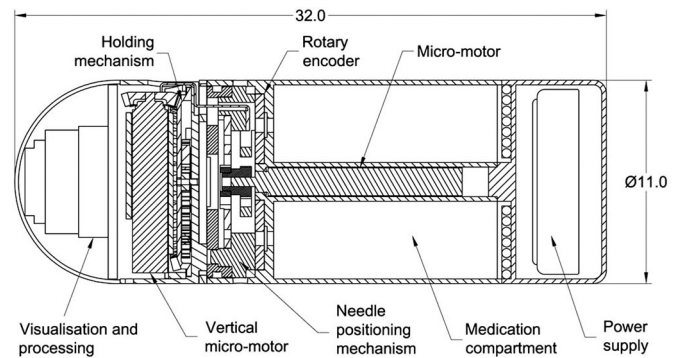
Cut-through view of the microrobot with the four main sections labeled.
